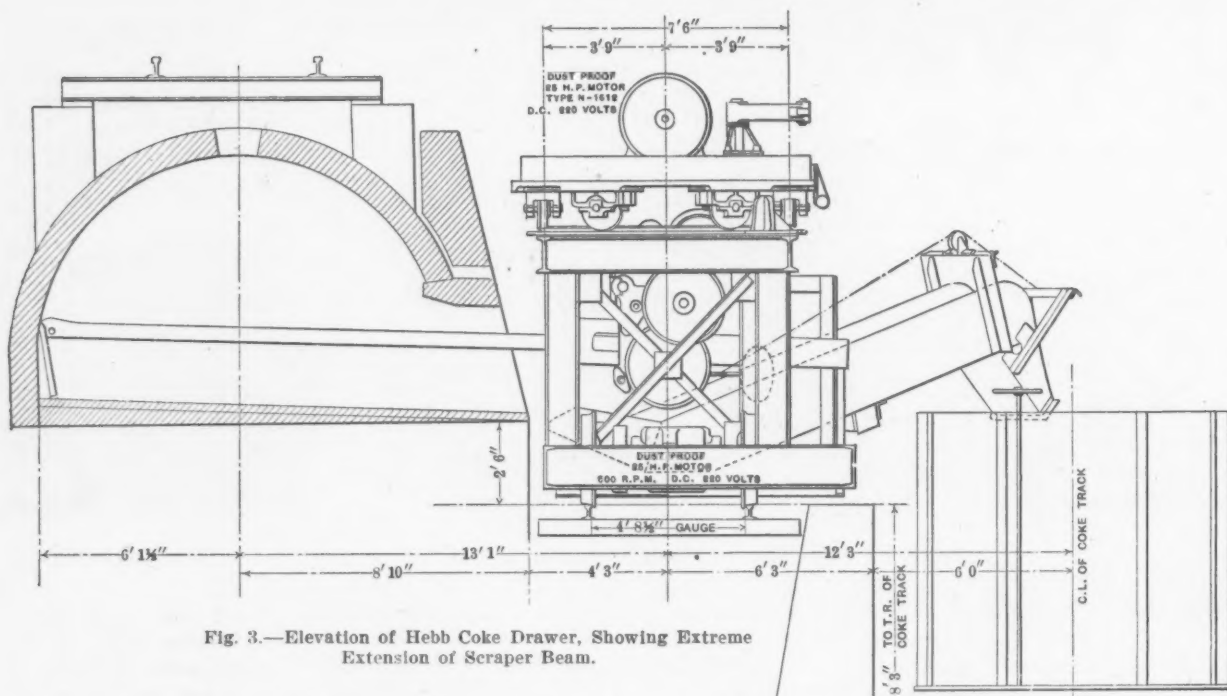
Elevation of Hebb Coke Drawer, Showing Extreme Extension of Scraper Beam.
